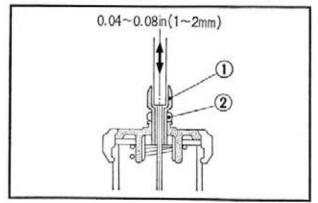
① Cable adjuster ② Cable adjuster lock nut
